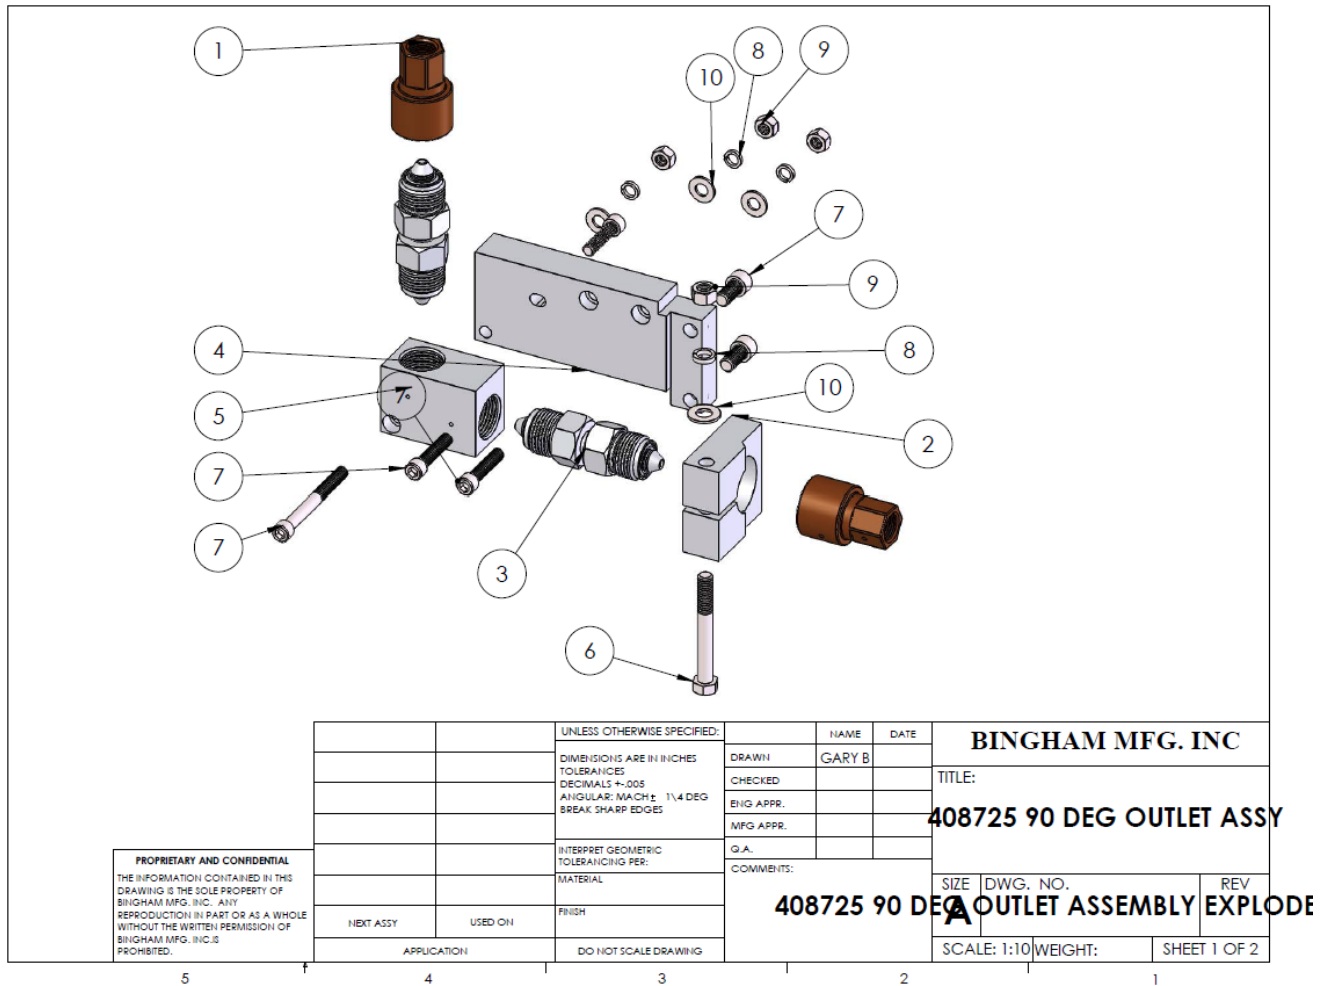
Drawing 408725 90° Outlet Assembly (Sheet 1)
